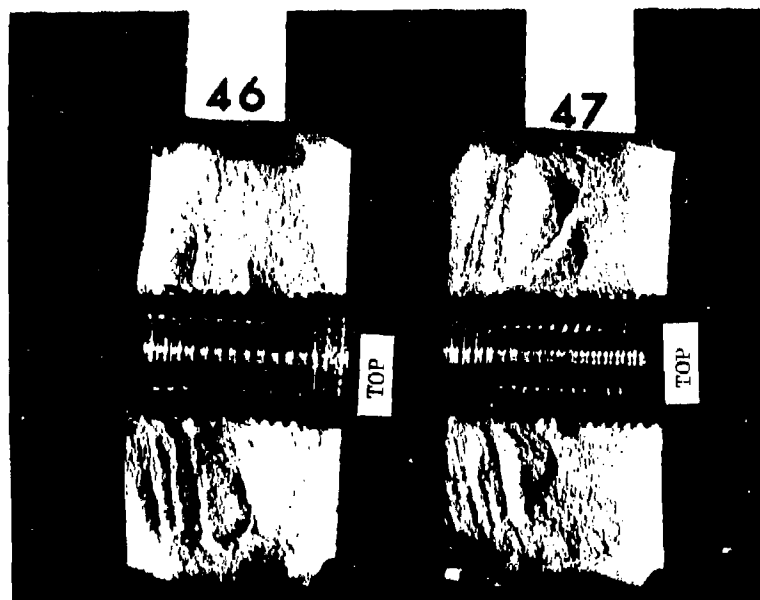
Close-up of Fatigue Failures of Specimen with Rosan and Tridair 3/8-24 Size Inserts. Inserts Installed by Manufacture. Torqued Bolts in Inserts During Tests.
